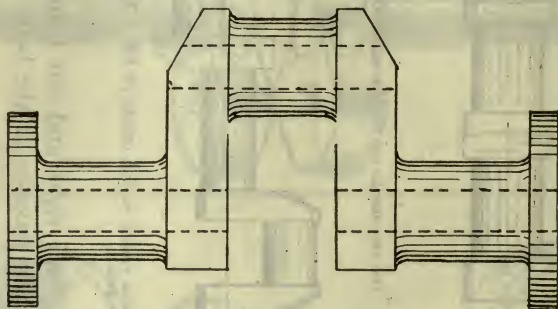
Duplicate section for large multi-cylinder crank shaft.
